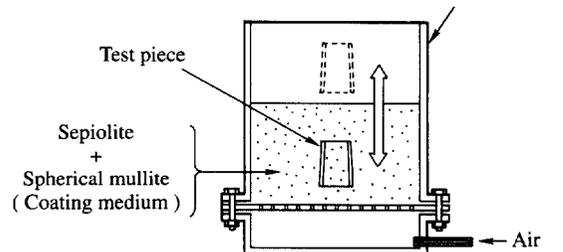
Sepiolite coating on shell mold in the fluidized bed.
